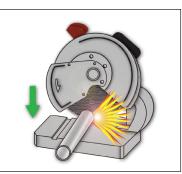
Mark the tubing. 2. Cut post to desired length. 3. De-burr the cut edge. 4. Remove any discoloration.
